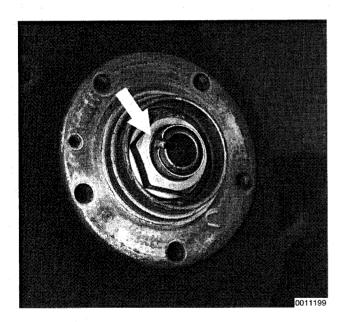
Staked part of wheel hub collar nut to be bent back (arrow).
